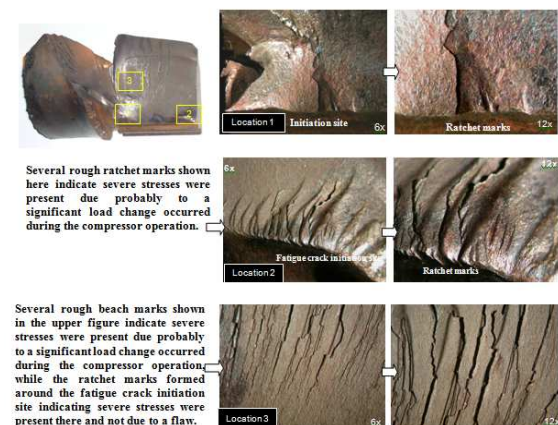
Close up view of fatigue fracture topography at different locations, showing the fatigue crack initiation sites having with several ratchet marks, and fatigue crack propagation area having with some smooth and rough beach marks
